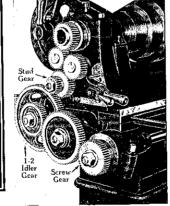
Change Gear Equipment Used on Standard Change Gear Lathes.
